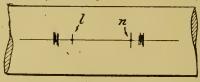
MAKING PORT MARKS ON VALVE SPINDLE.
